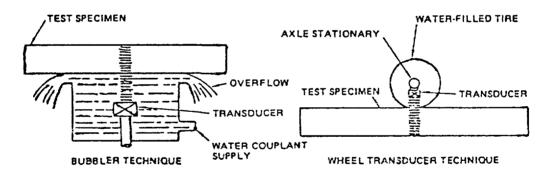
Bubbler and Wheel Transducer Techniques.
